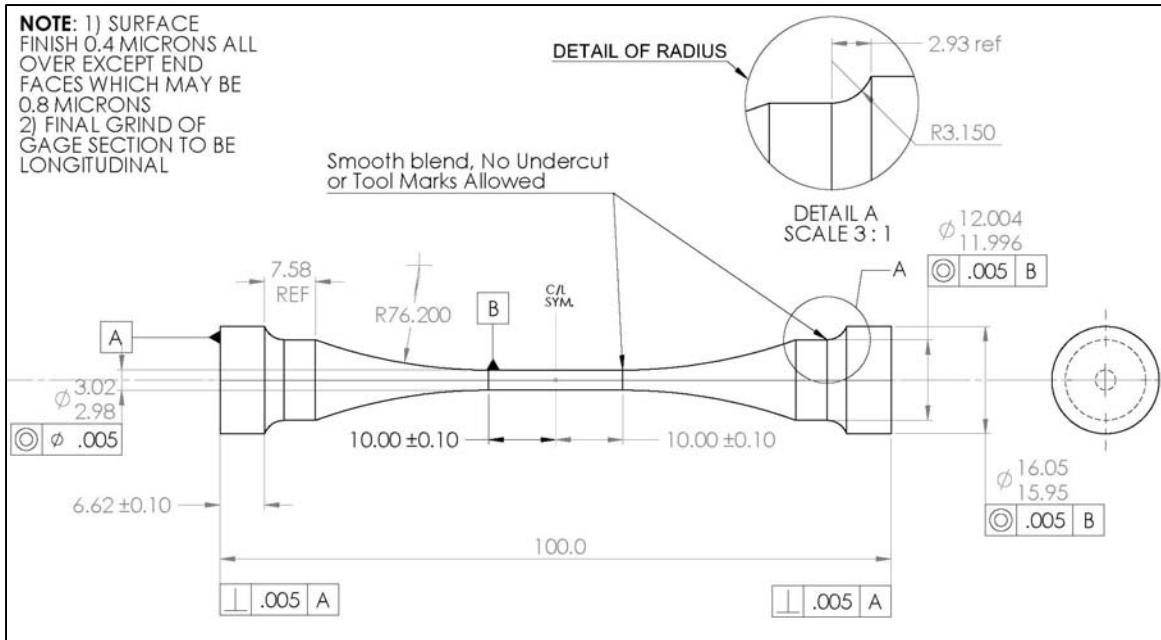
Drawing for the new ceramic tensile specimen with a 3-mm gauge section diameter.
